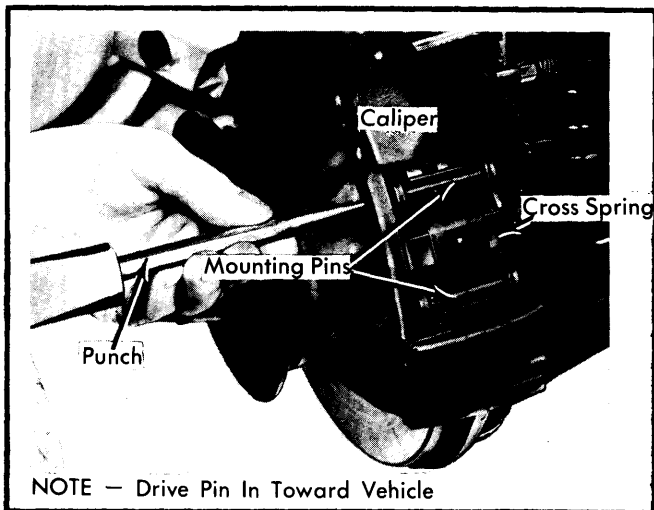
Knocking Out Disc Pad Mounting Pins On Teves Model Brakes
